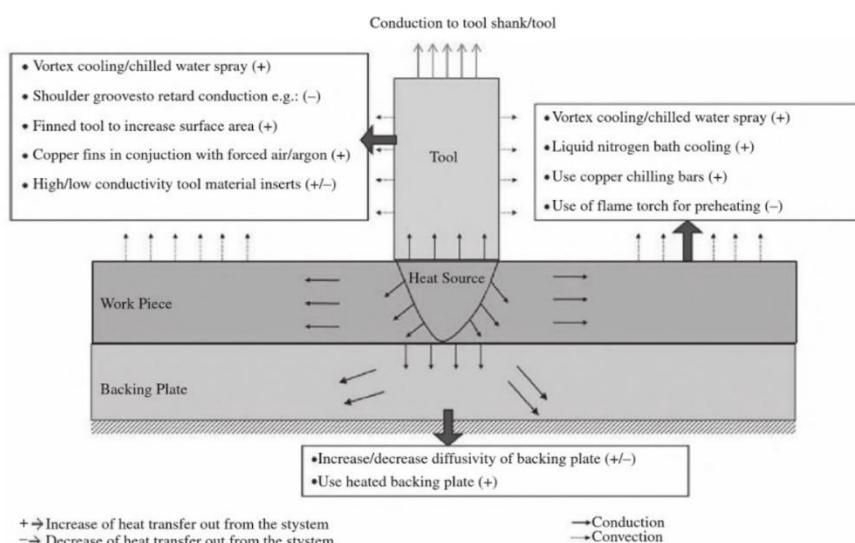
Thermal management methods that can be used in friction stir welding process. Arrows indicate heat transfer – Courtesy of [1-11]
